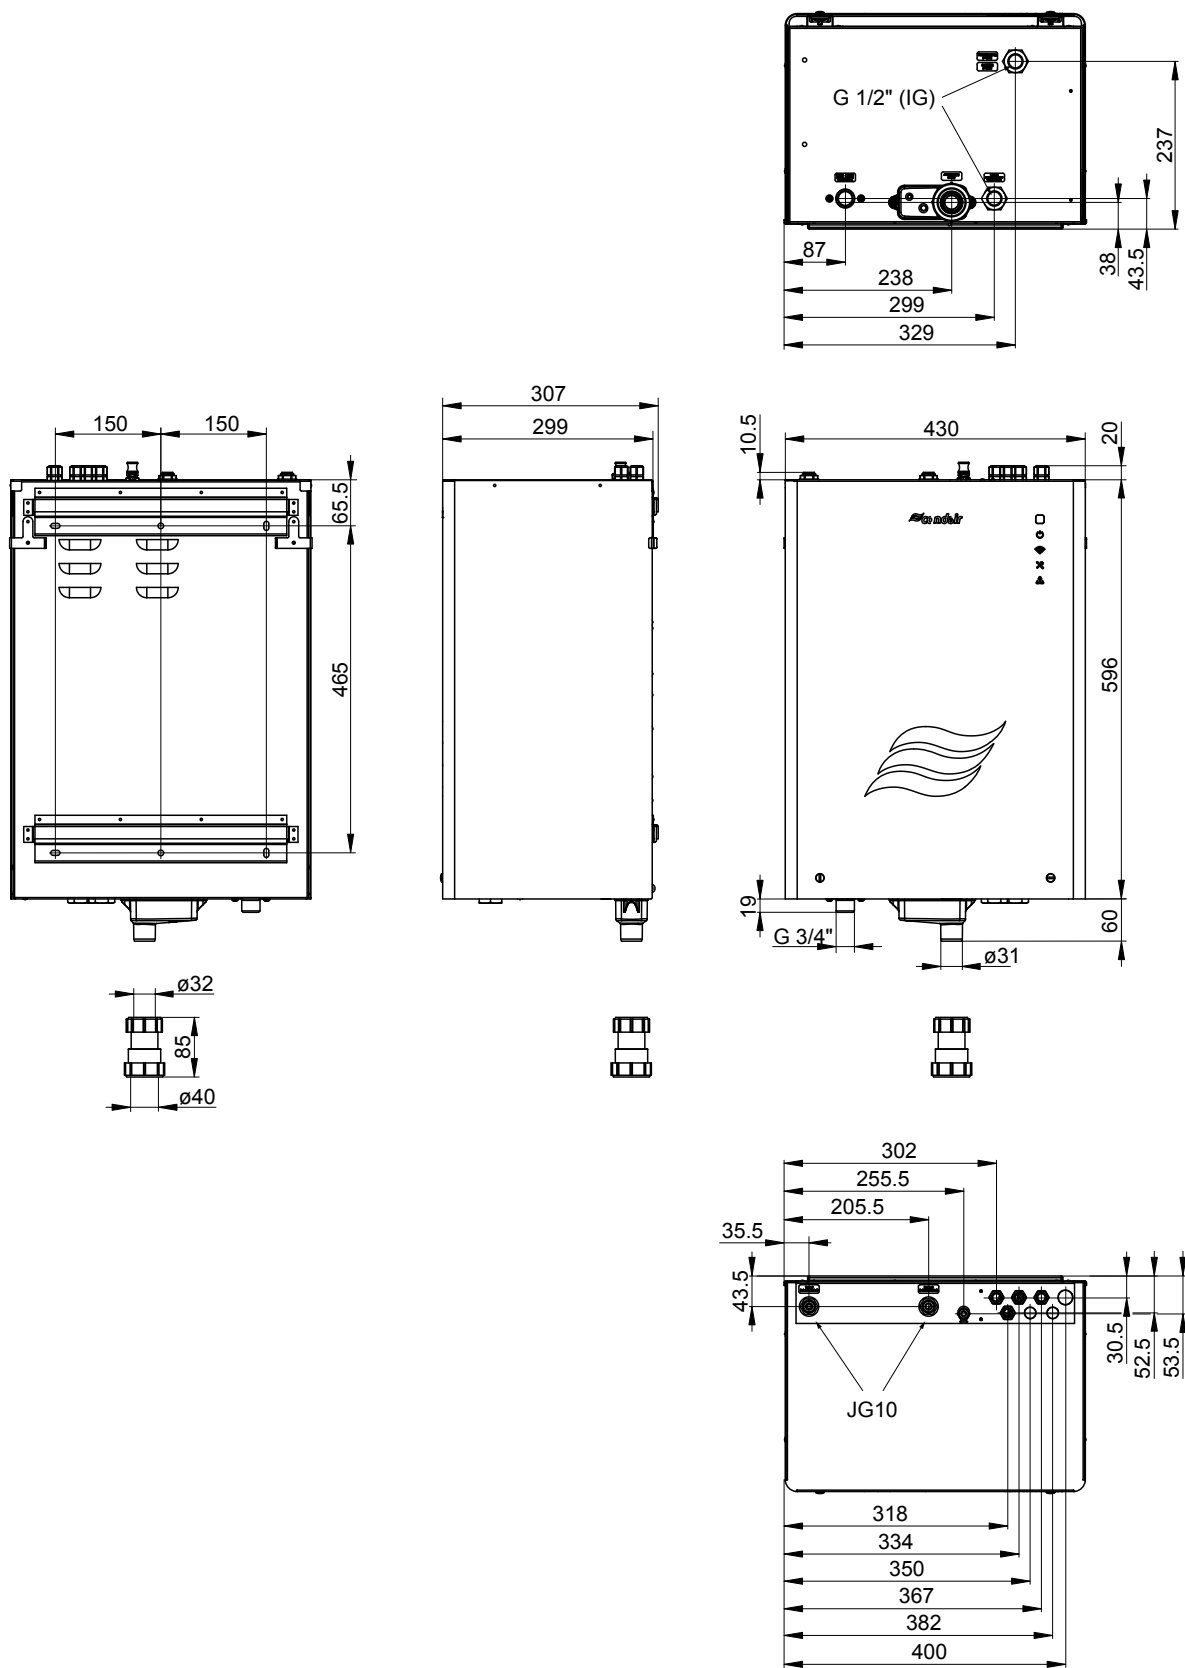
Dimensional drawing of hydraulic unit (dimensions in mm)
